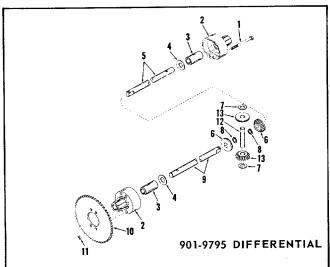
DIFFERENTIAL-EXPLODED VIEW
